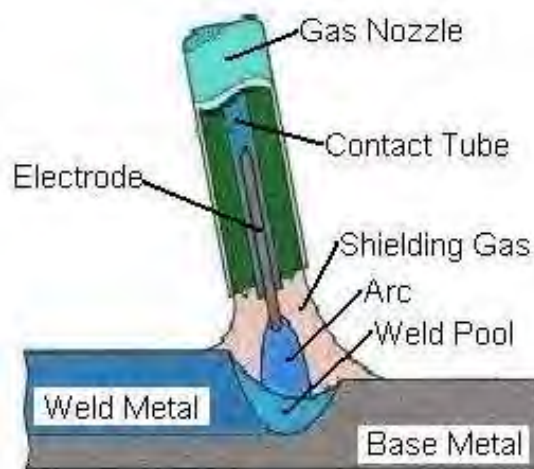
MIG Welding (Mvola and Kah, 2016)
